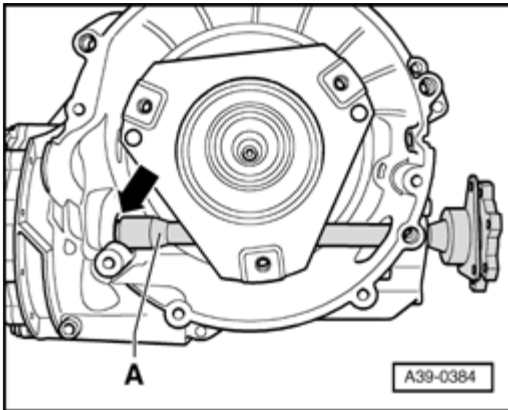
Removing/Inserting Flange Shaft Into Transmission And Guide Shaft Into Seal On Differential
